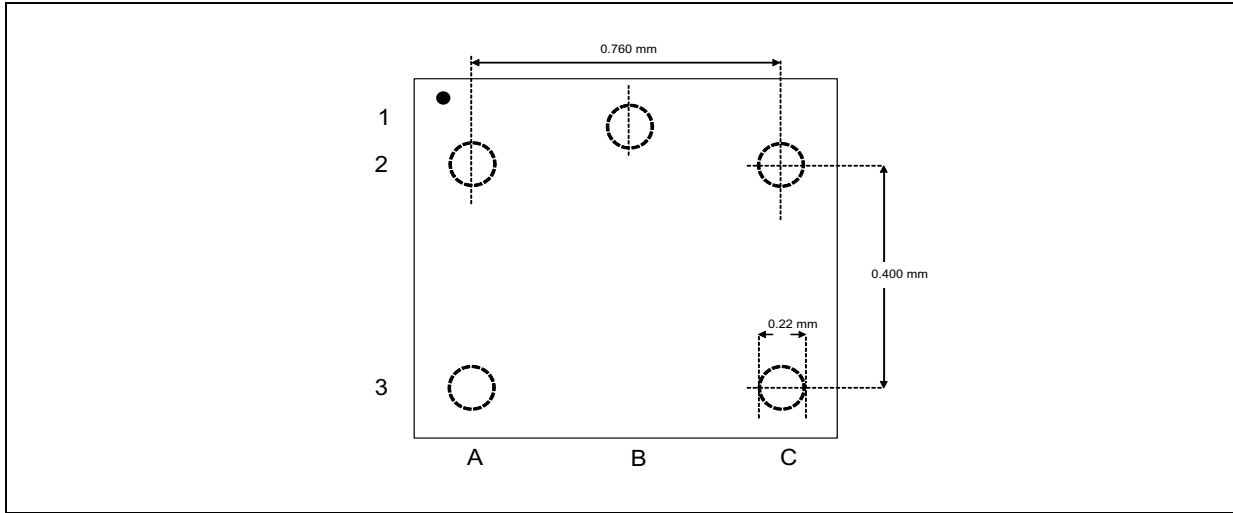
Footprint - 3 mils stencil - non solder mask defined
